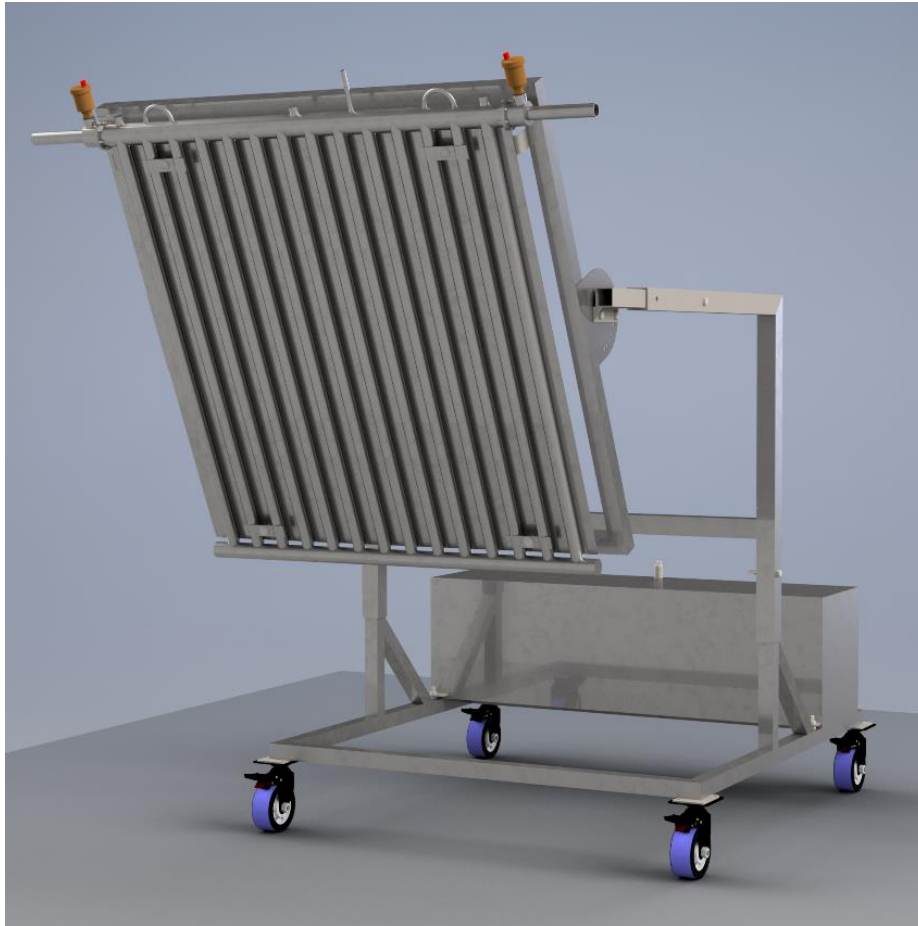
Three dimensional design of the Flat Heat Pipe mounted on the stand
